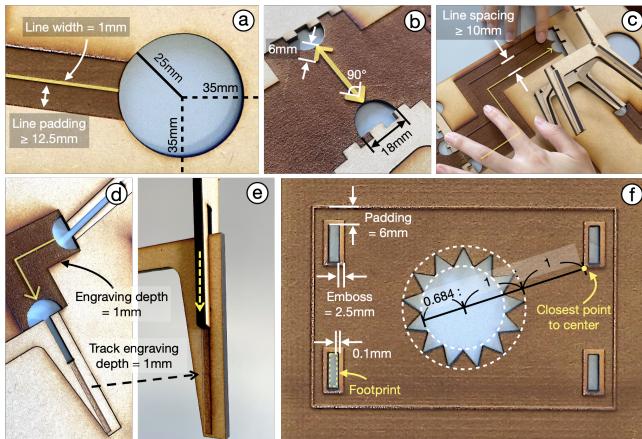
Daedalus assembly cues and their configurations. (a) Hollowed circle in the bottom-right of the plate that links to the entry component. (b) Double-headed arrow indicates finger joint pair. (c) Participants place half-assembled models back into the plate to access pairing cues. (d) Single-headed arrow marks the joining direction of slot joints. (e) Rastered guide track showing join completeness for slot joints. (f) Ground support for FingerMT chair.
